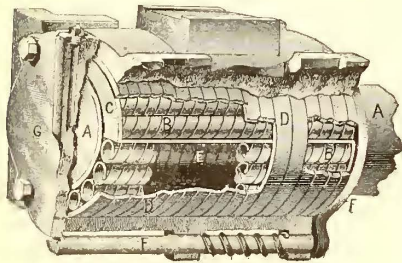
ROLLER BEARING FOR CAR BOXES.
